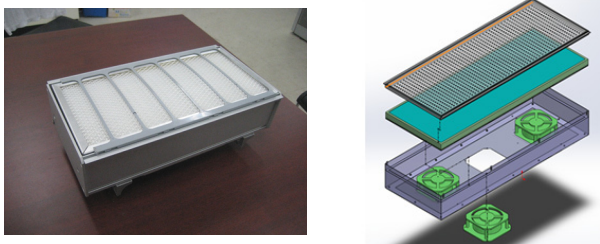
View of the air supply unit (chamber) with the air filter shown in Figs. 1 and 2
